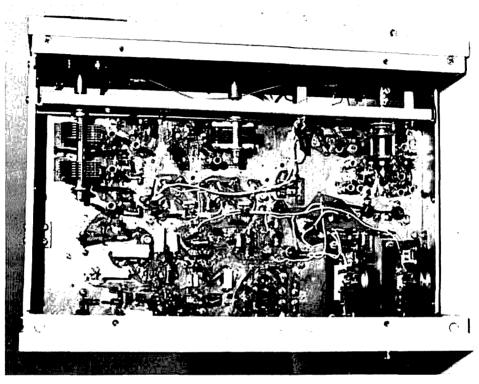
The complete parts layout for the A80-10 is shown on the facing page, the printed-circuit layout is shown in fig. 13 and the construction and panel layout of the receiver is shown above.
